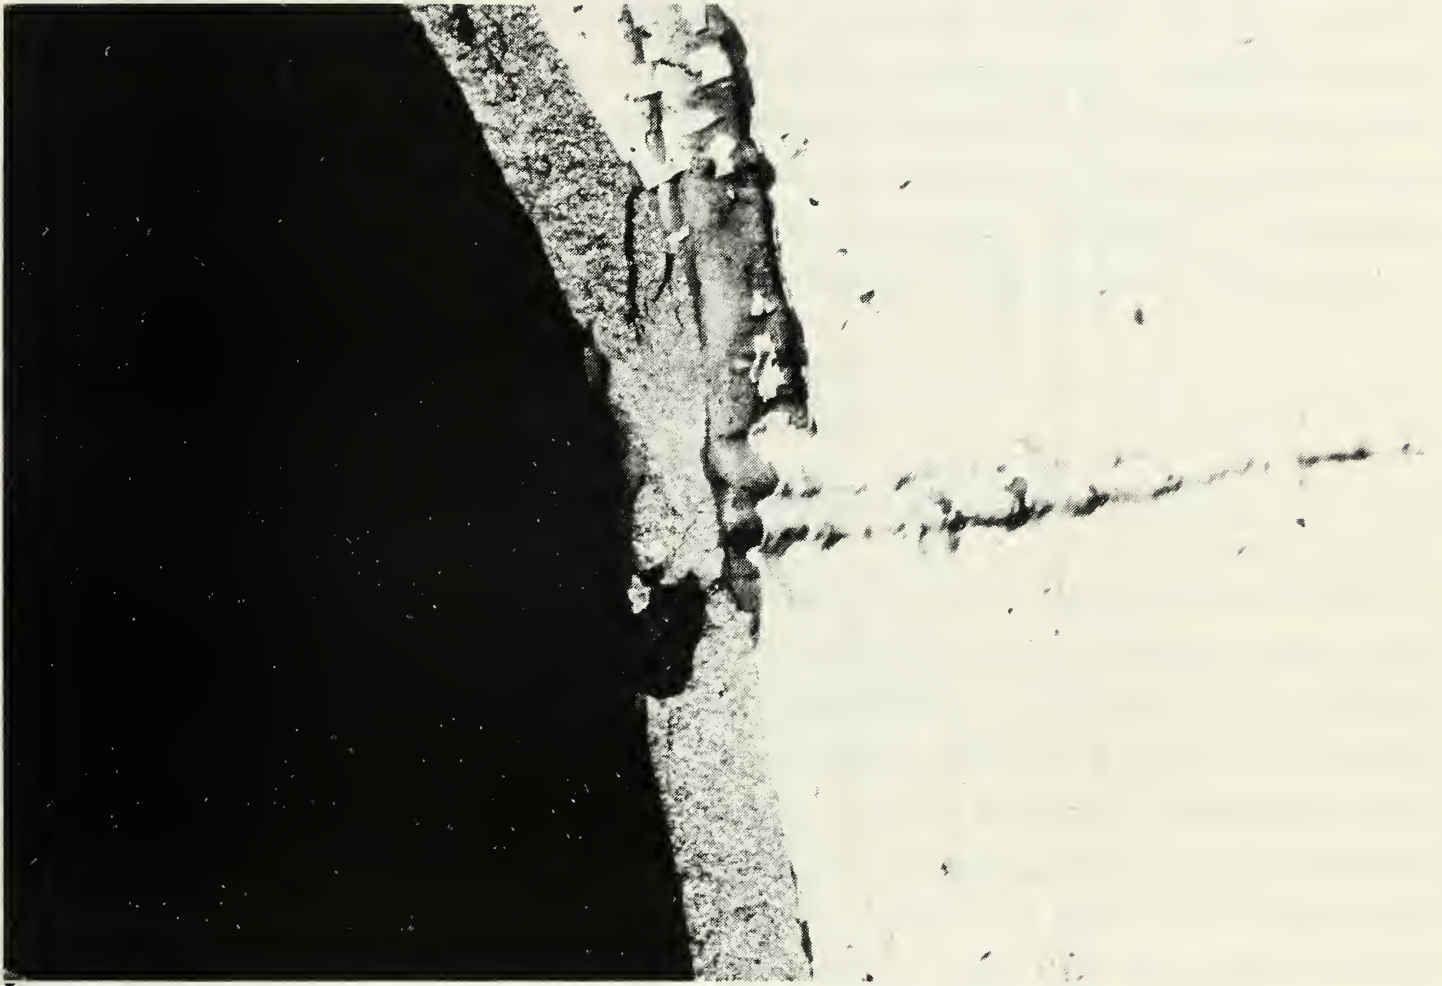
Dark Area on Right Fracture Surface
